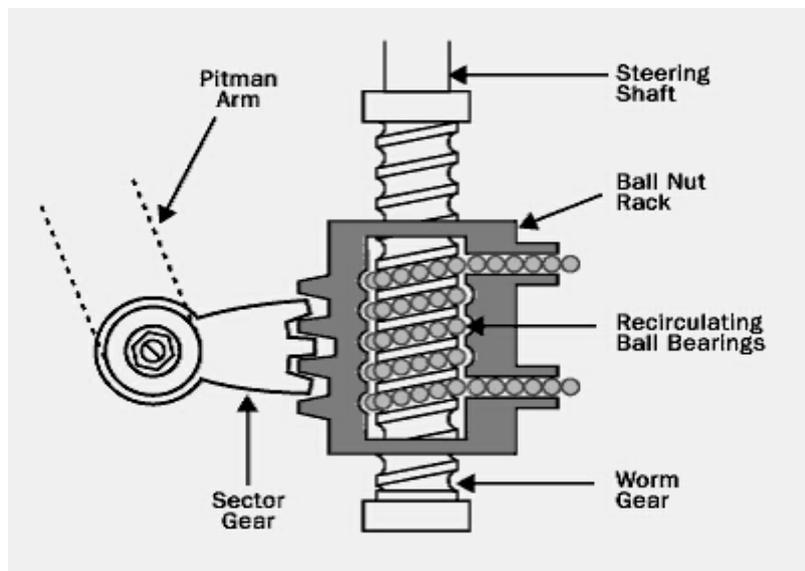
Dissected worm and nut steering gear system (<http://auto.howstuffworks.com/steering3.htm>)
